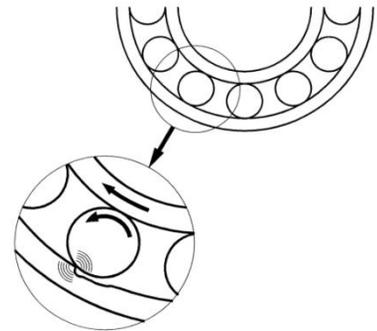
A defect in the outer race causes a shock impulse to spread through the bearing components and machine structure.
